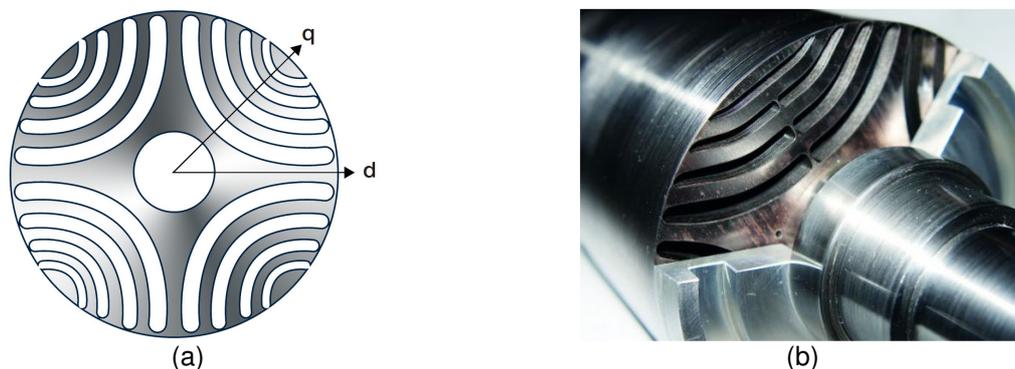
SynRM rotor: (a) cross-section schematic representation; (b) detail of a built rotor [6].
